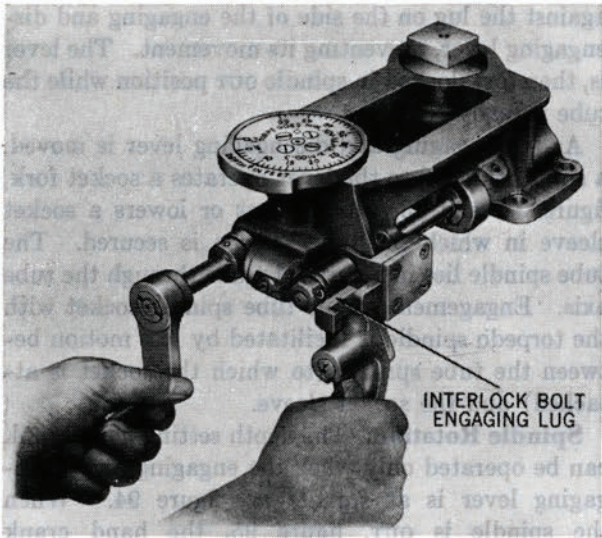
Depth Setting Mechanism—Left-hand Tube—Spindle IN.
